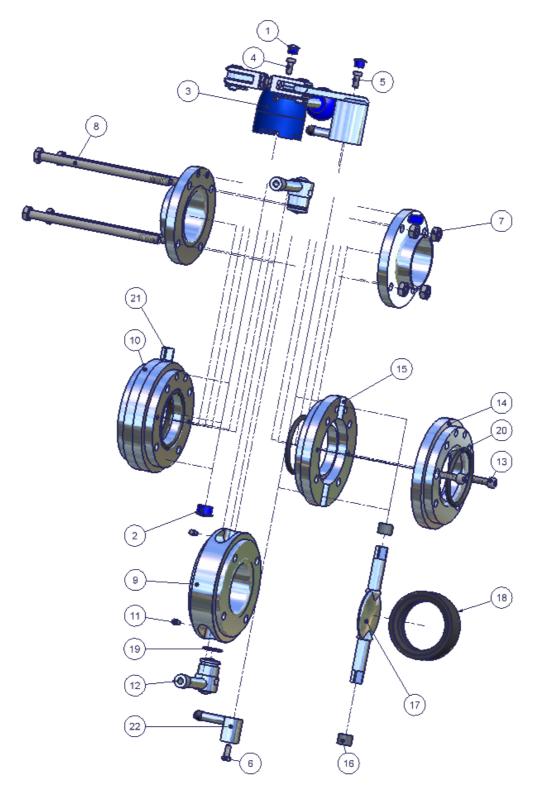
Exploded Assembly Drawing LSV07 manual HB04
